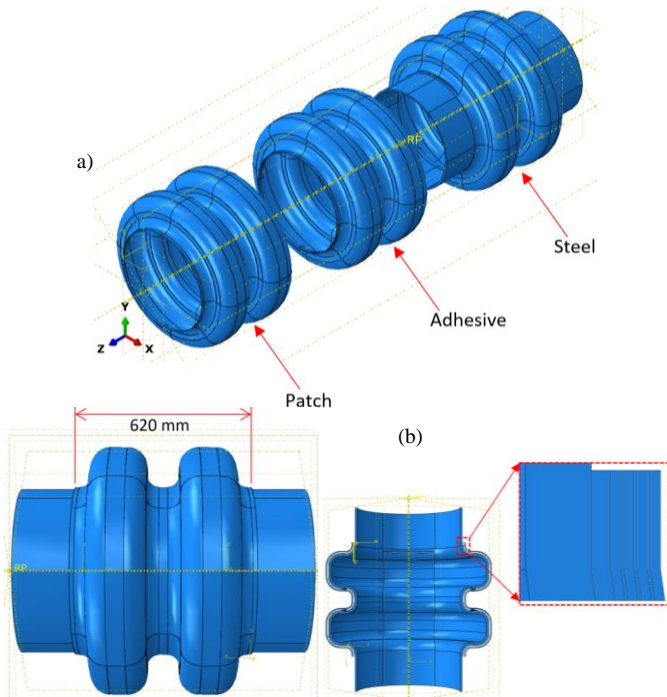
a) Expansion joint, adhesive and patch sleeve; b) expansion joint repair by composite sleeves in contact.
